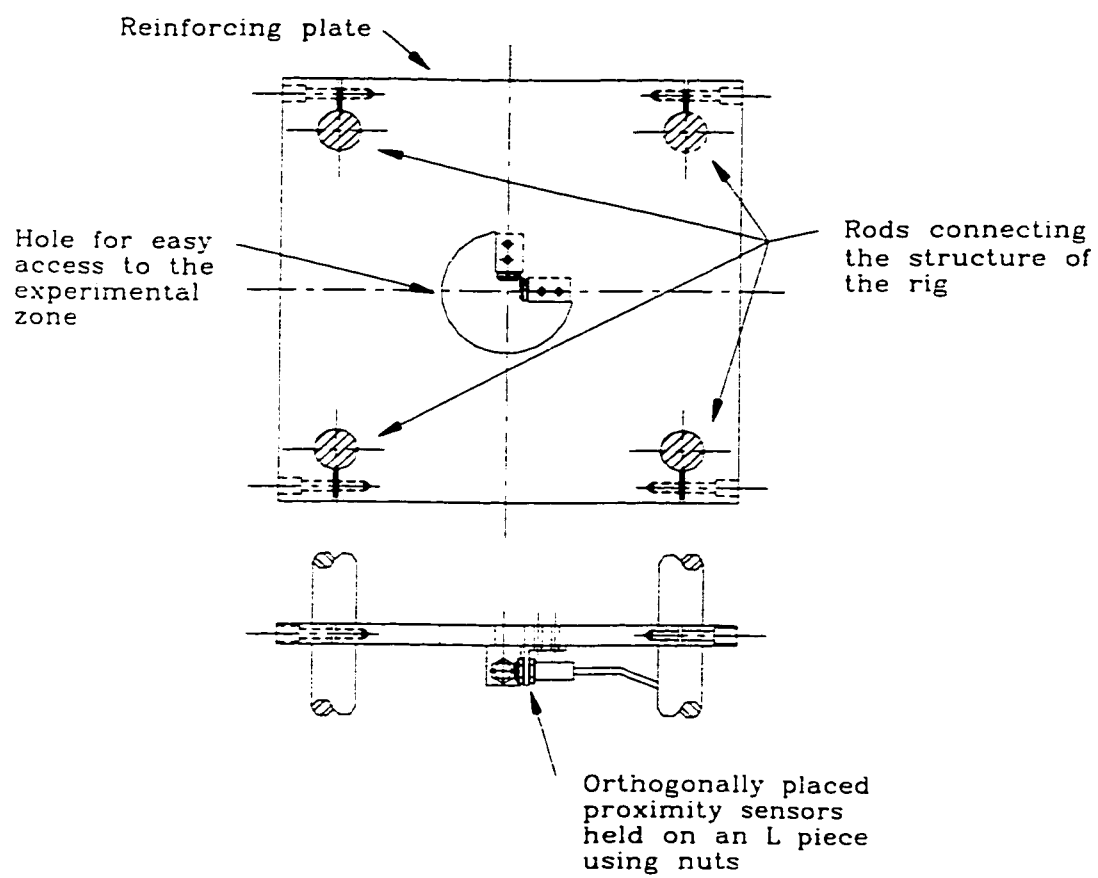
Sub-assembly drawing of the proximity sensor attachment
